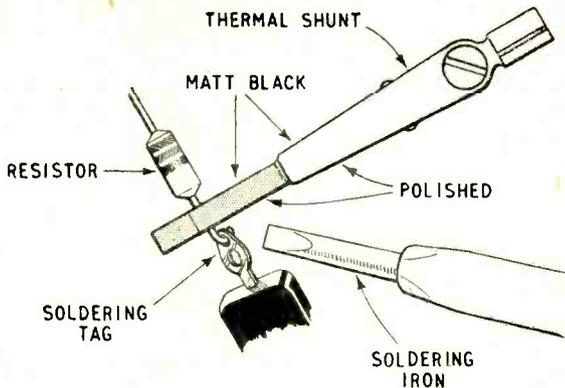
When soldering a resistor to a soldering tag the jaws of the thermal shunt must not be in contact with both the tag and the component.
